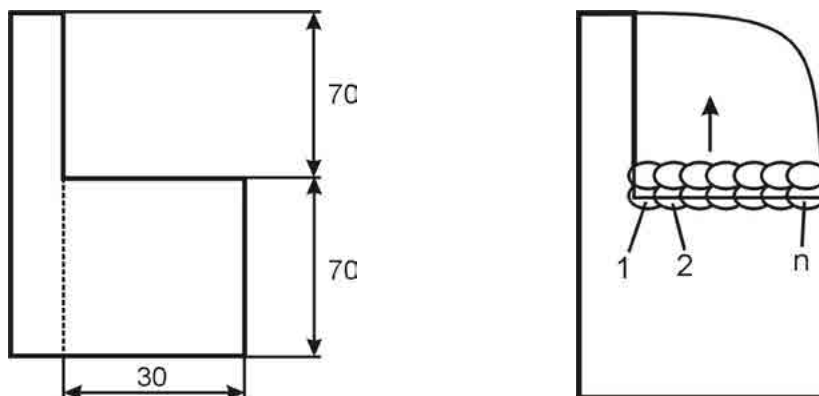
Preparation of element for overlay welding (left) and layer application sequence during buffering overlay welding by means of MIG method and wire NiCro 60/20 (right)
